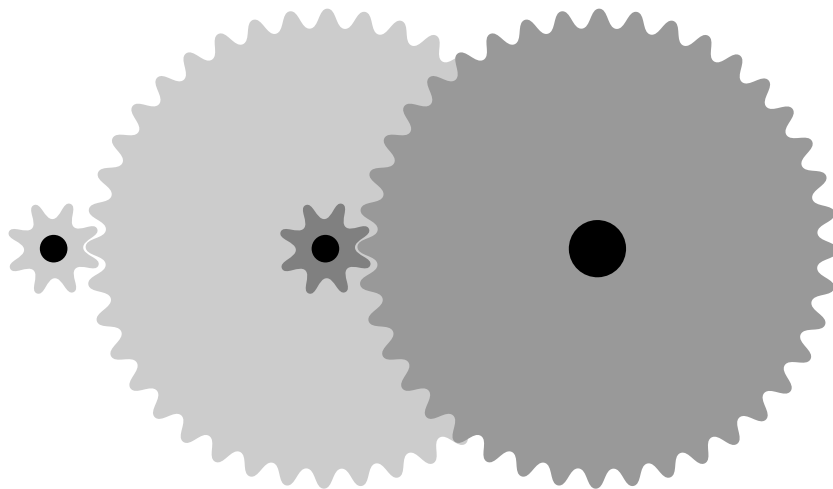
Two-stage gearing. The first small gear drives a large gear, which is fixed to the same shaft as a second small gear. The second gear drives another large gear, producing an overall gear ratio of 25:1.
